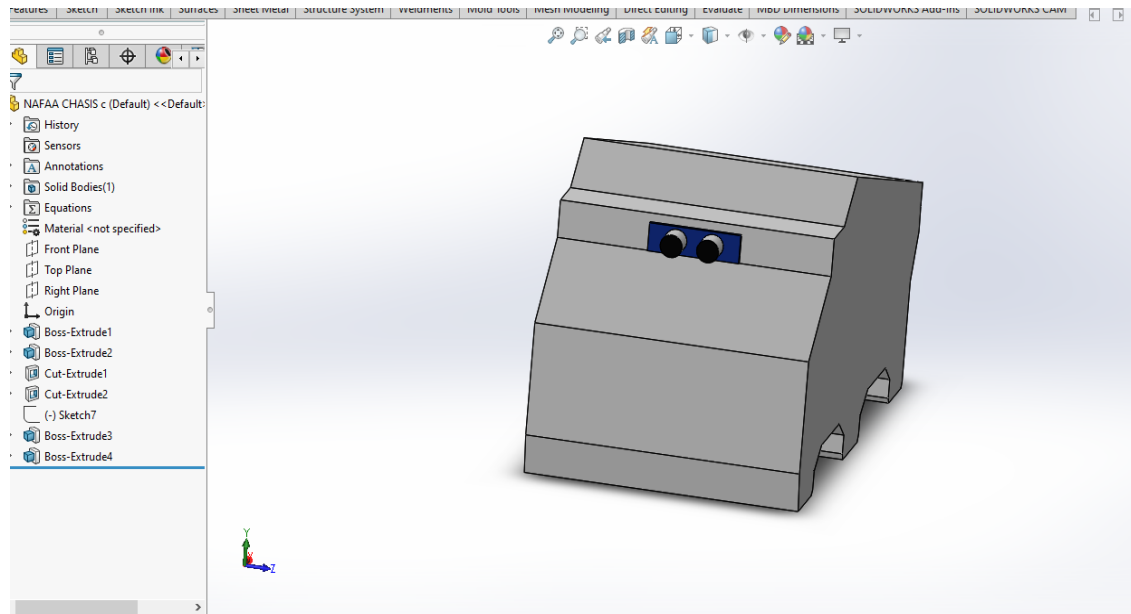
CleanRayX body « printed by 3D printer PLA »
